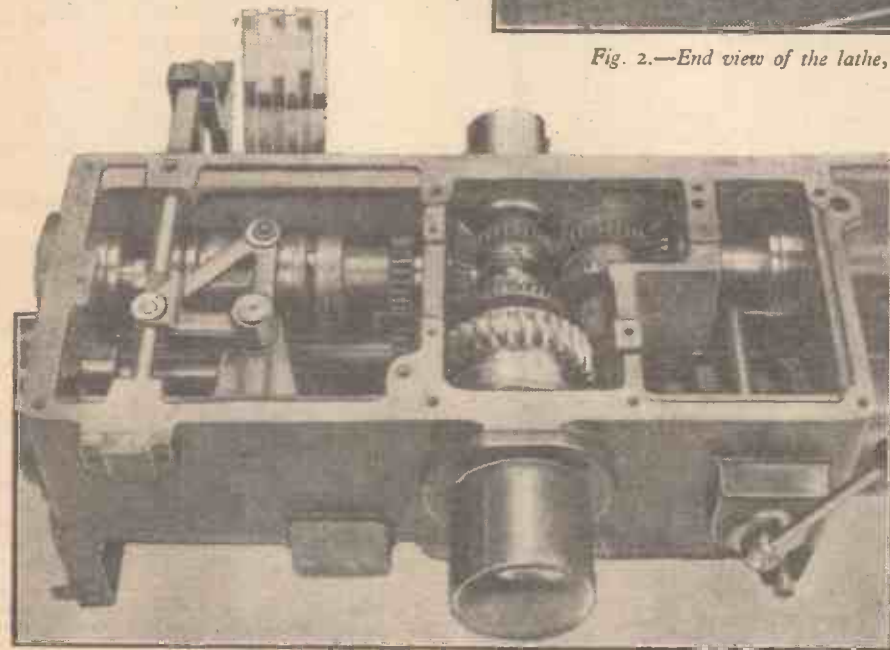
View of the feed gear-box, with cover removed. This unit is a marvel of engineering skill, and in operation has a very beautiful movement.
